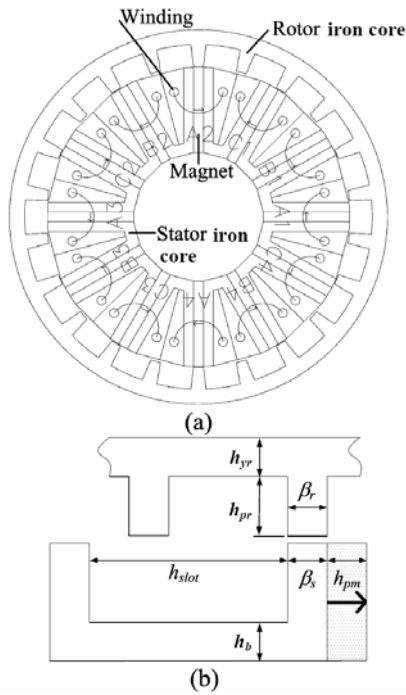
Topology of a 12/22-pole three-phase outer-rotor PMFS machine, (a) Cross-section. (b) Main dimension.
